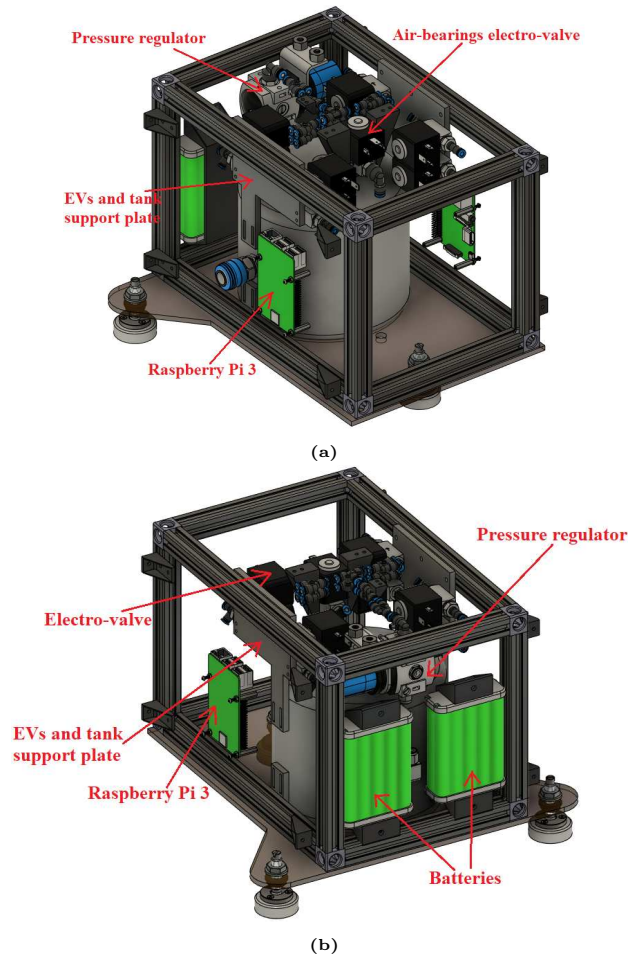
Second preliminary design of the module: (a) View 1, (b) View 2.
